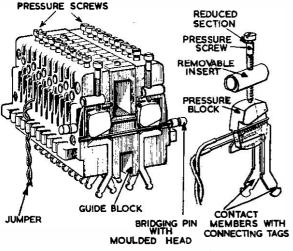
SKETCH OF ASSEMBLY STRIP.
